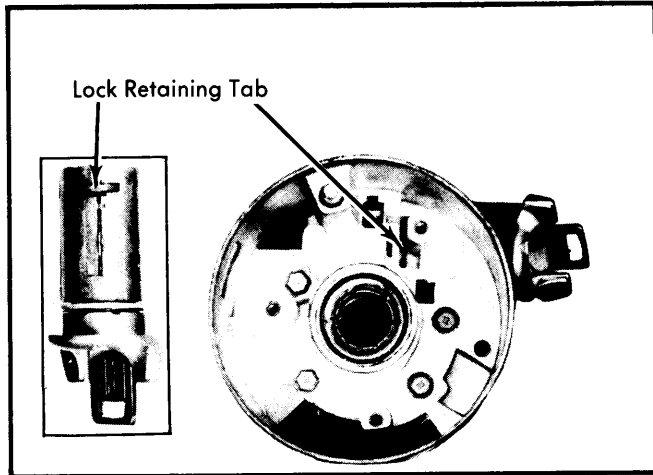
Ignition Lock Cylinder Removal (Retaining Tab Type)
